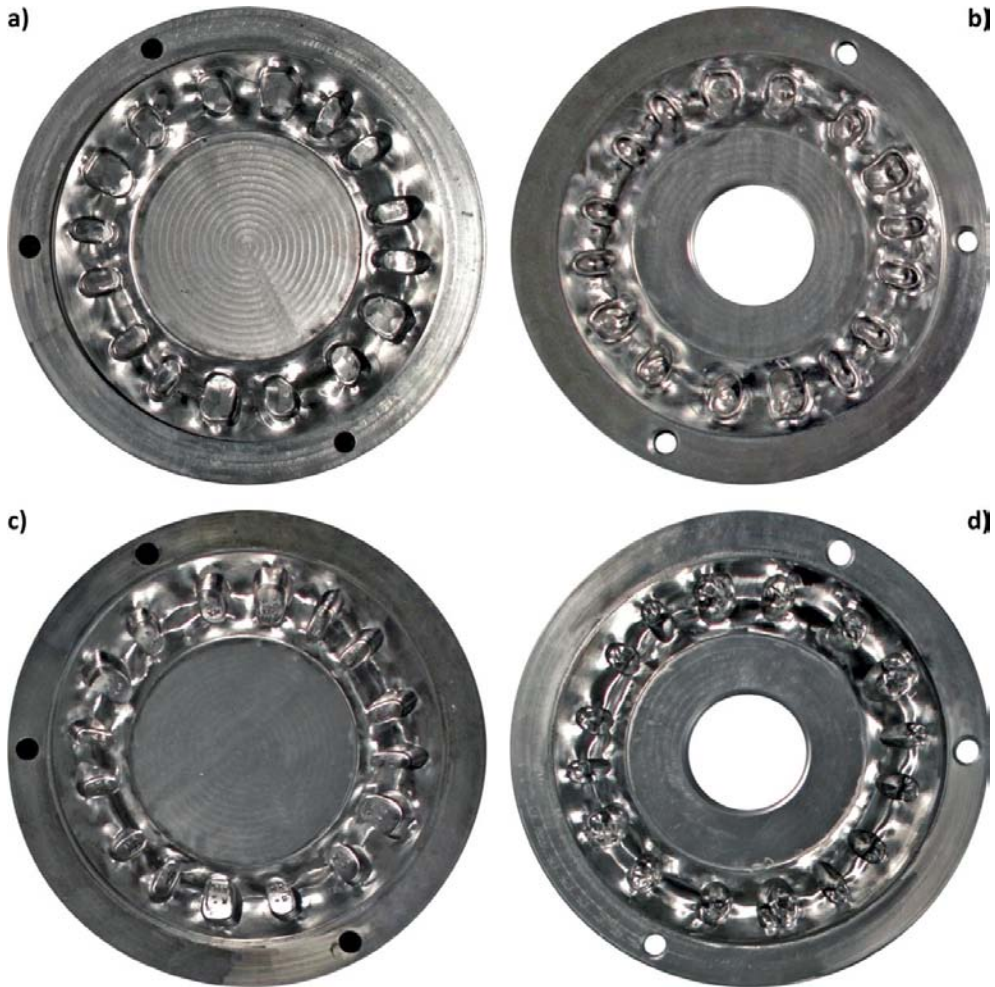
Sequence of molds for the innovative production procedure. a) bottom mold half, b) top mold half, c) back mold half, and d) final mold half.
